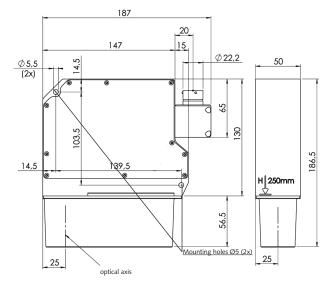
Dimensions of the Correvit S-HR sensor with 90° connector
